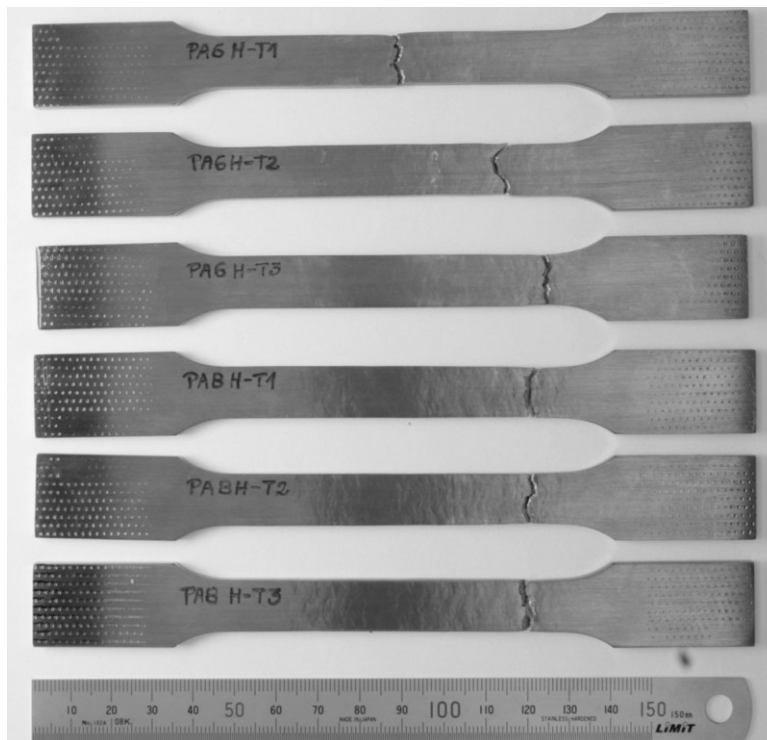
Location of fracture in tensile specimens machined from WAAM Ti-6Al-4V walls (labelled PA6 and PA8) with their longitudinal axis parallel to the welding direction.
